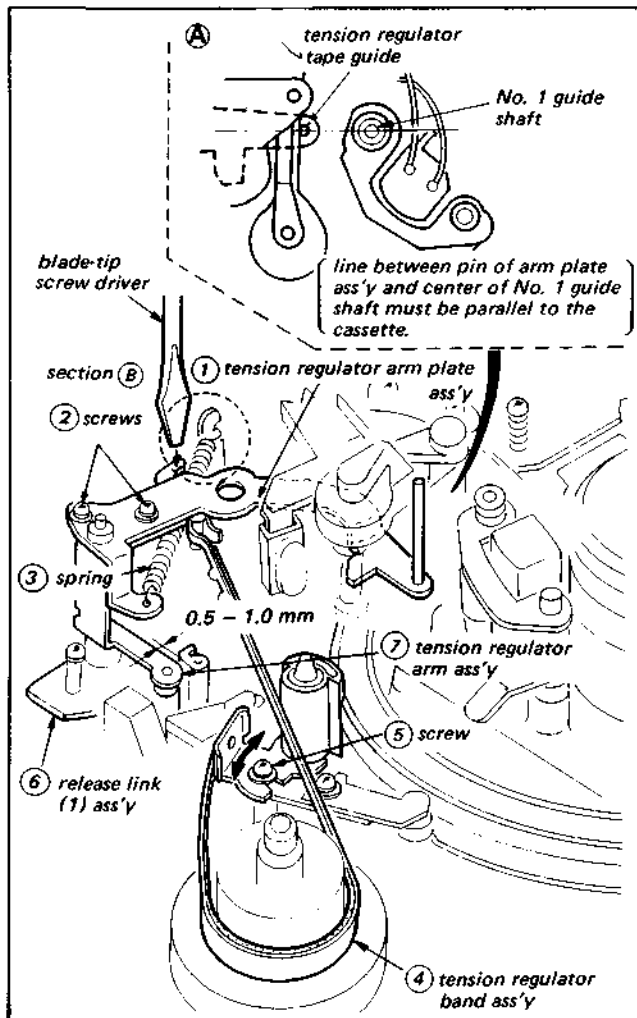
Replacement and adjustment (1) of tension regulator arm plate assembly
